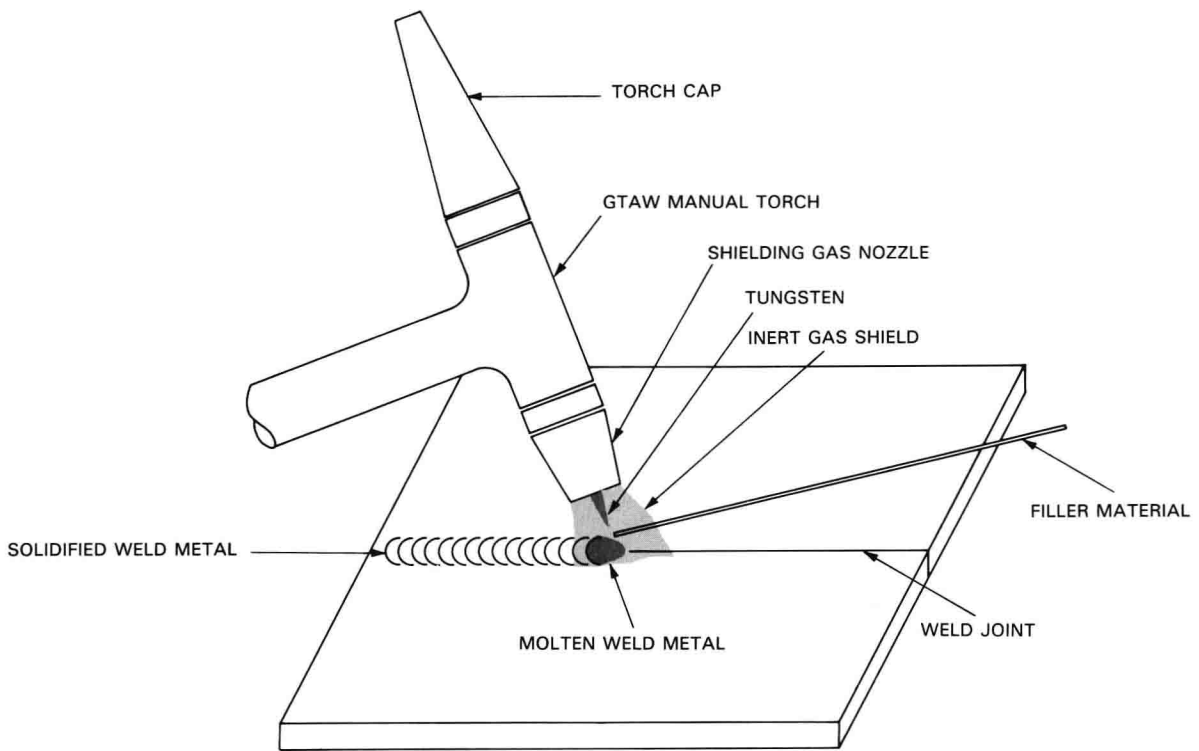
The GTA welding torch is moved along the weld joint melting the base material. Filler material is added as needed by the operator.
